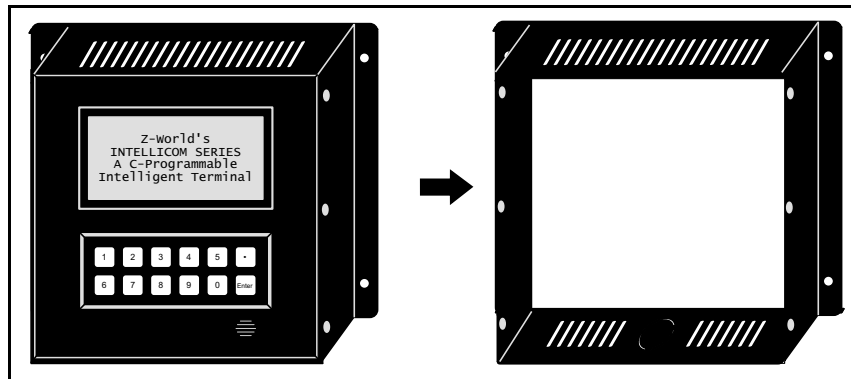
Remove and Set Aside Outer Casing and Accessory Parts
